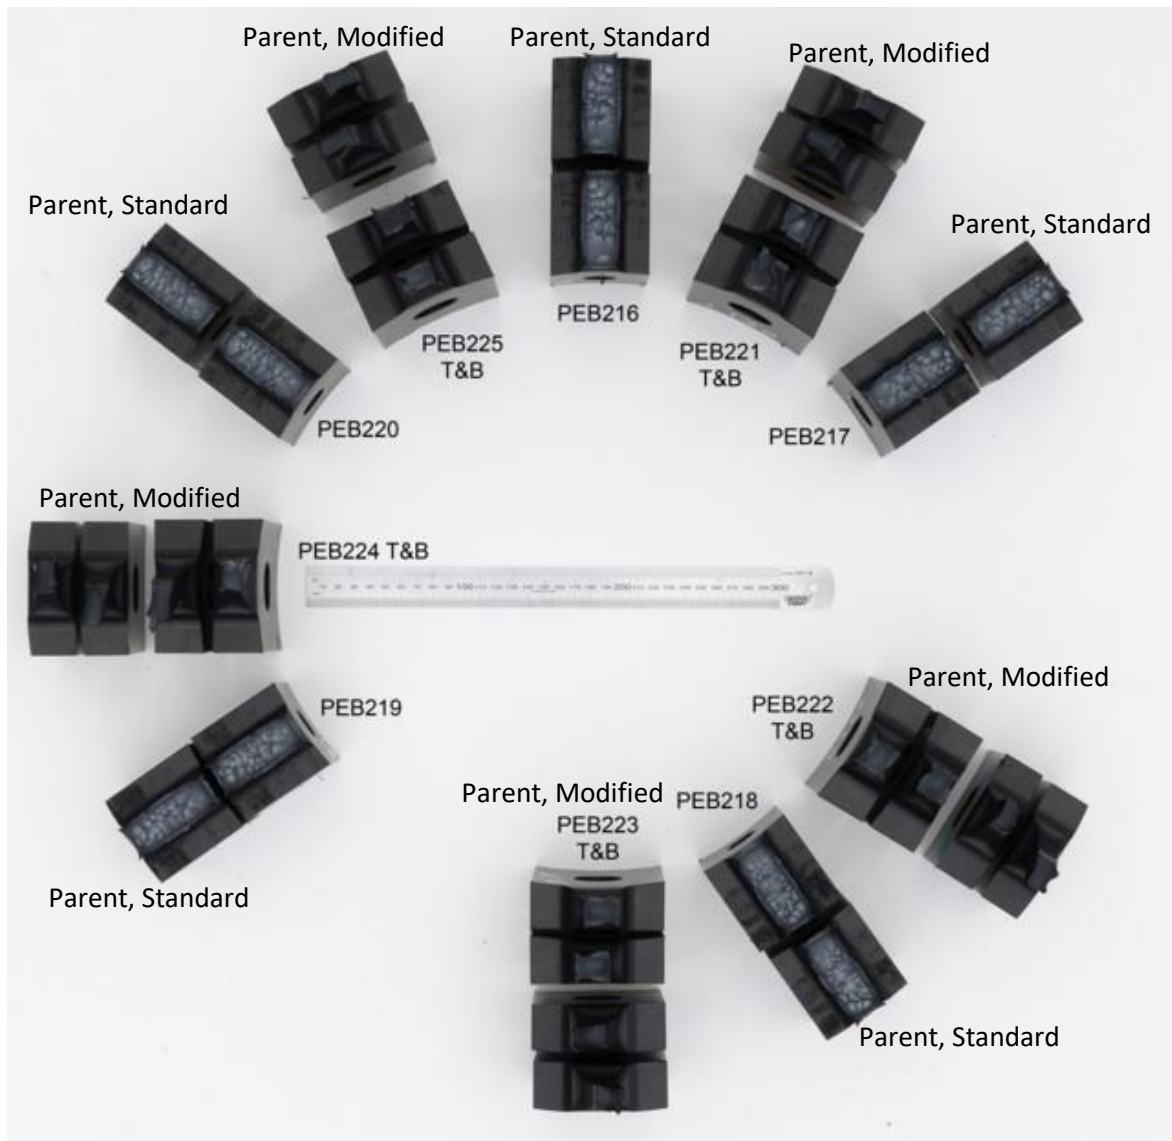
, Fracture surface for parent 630mm OD pipe SDR11 using standard and modified geometry
